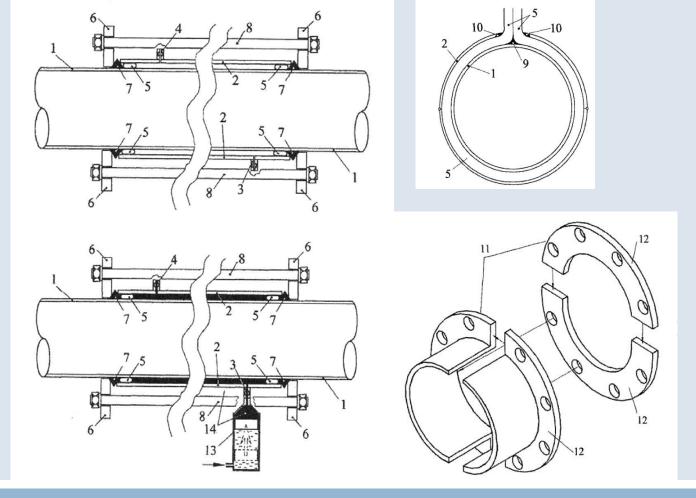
Method of pipeline defect repair with the use of folded sleeve and tightening flanges, pat. # 72840
